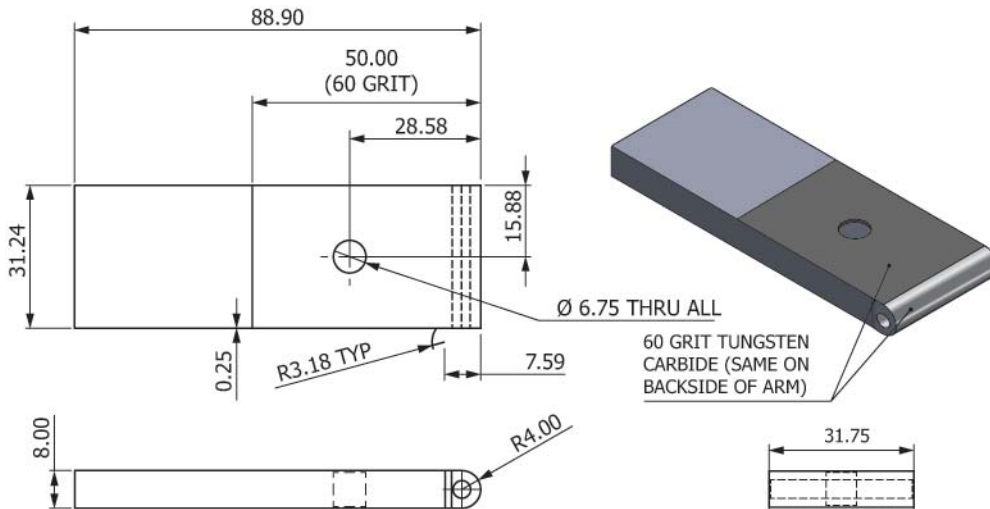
Dimensions of Peel Test Sample Arms (dimensions in mm)
